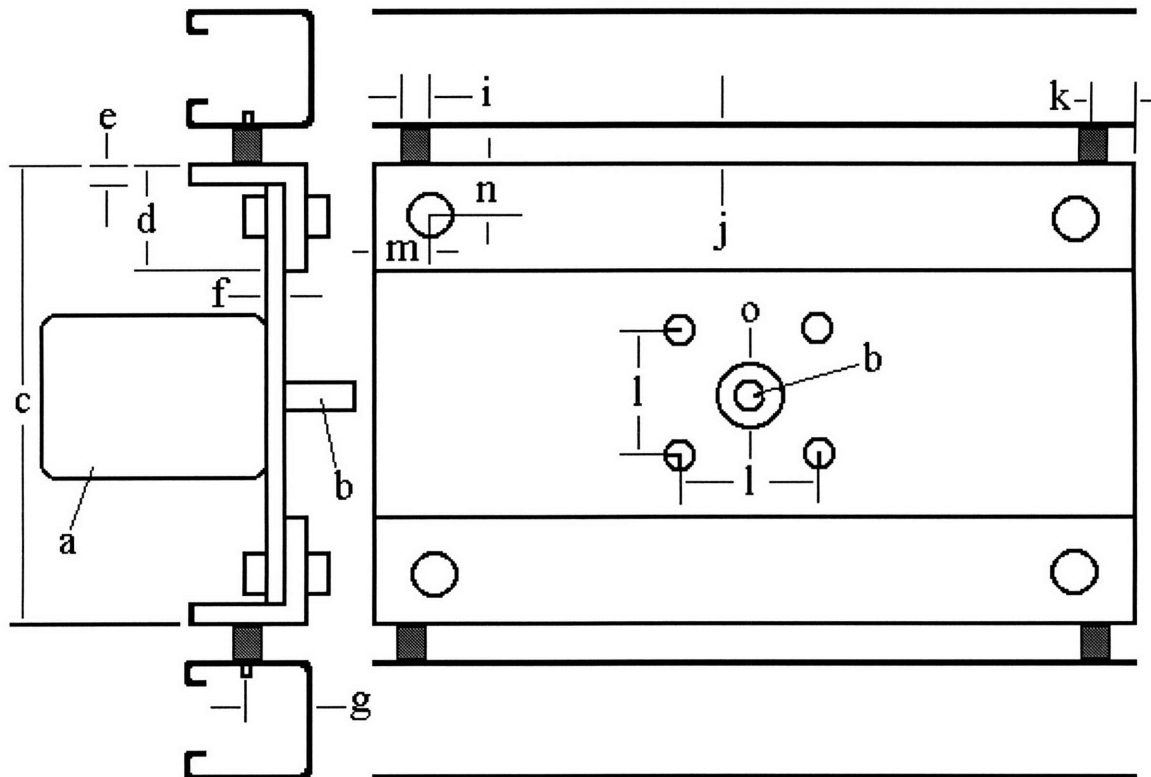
Motor Mount Assembly with Initial Damping Coupling Configuration
